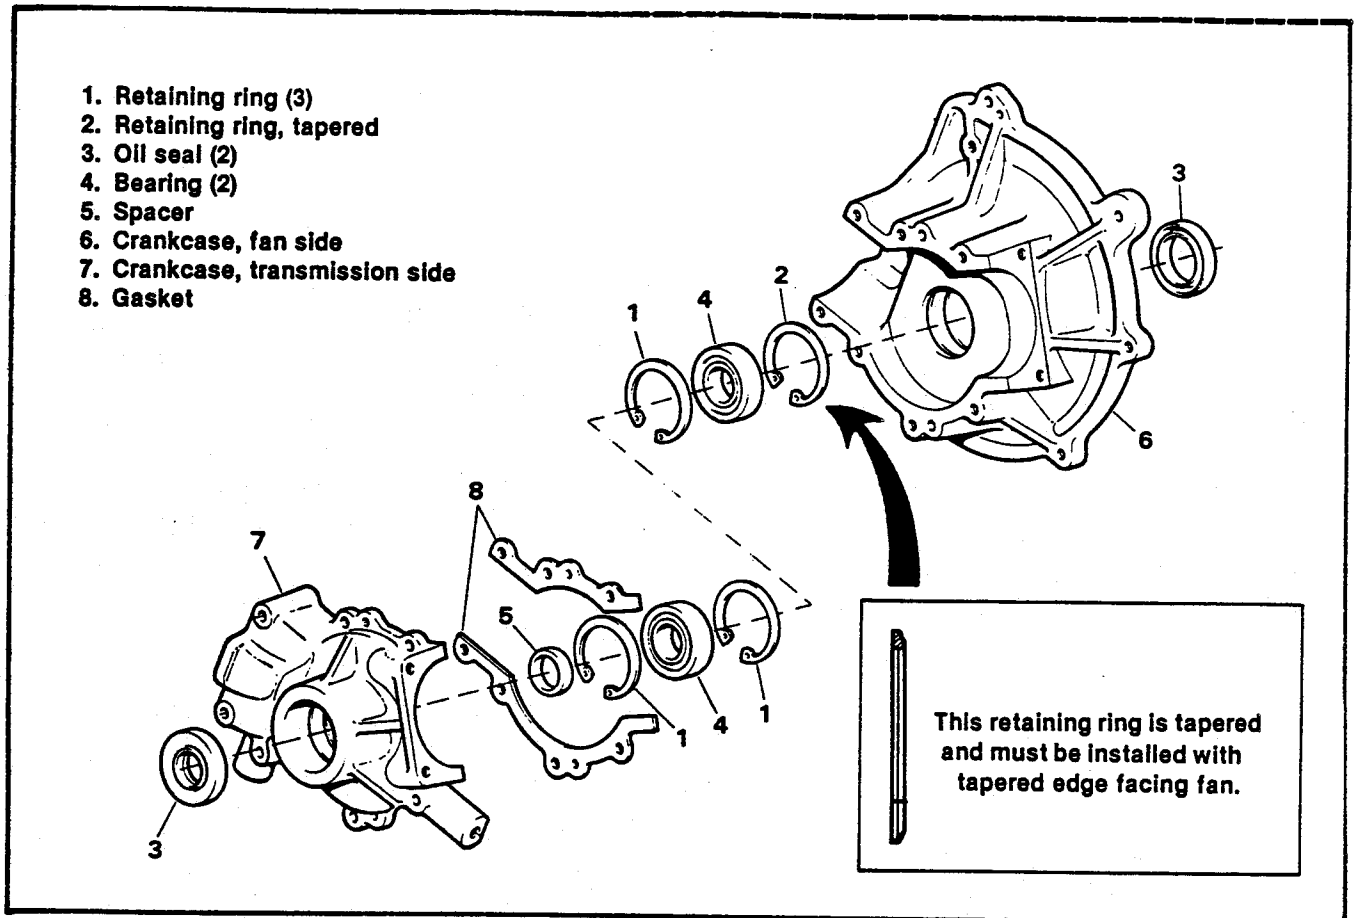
Crankcase Oil Seals and Retaining Rings — Exploded View
